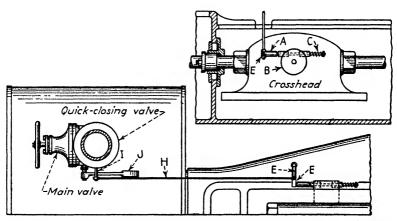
Crosshead overspeed trips weight-operated butterfly valve. (Courtesy of Ingersoll-Rand Co.)
